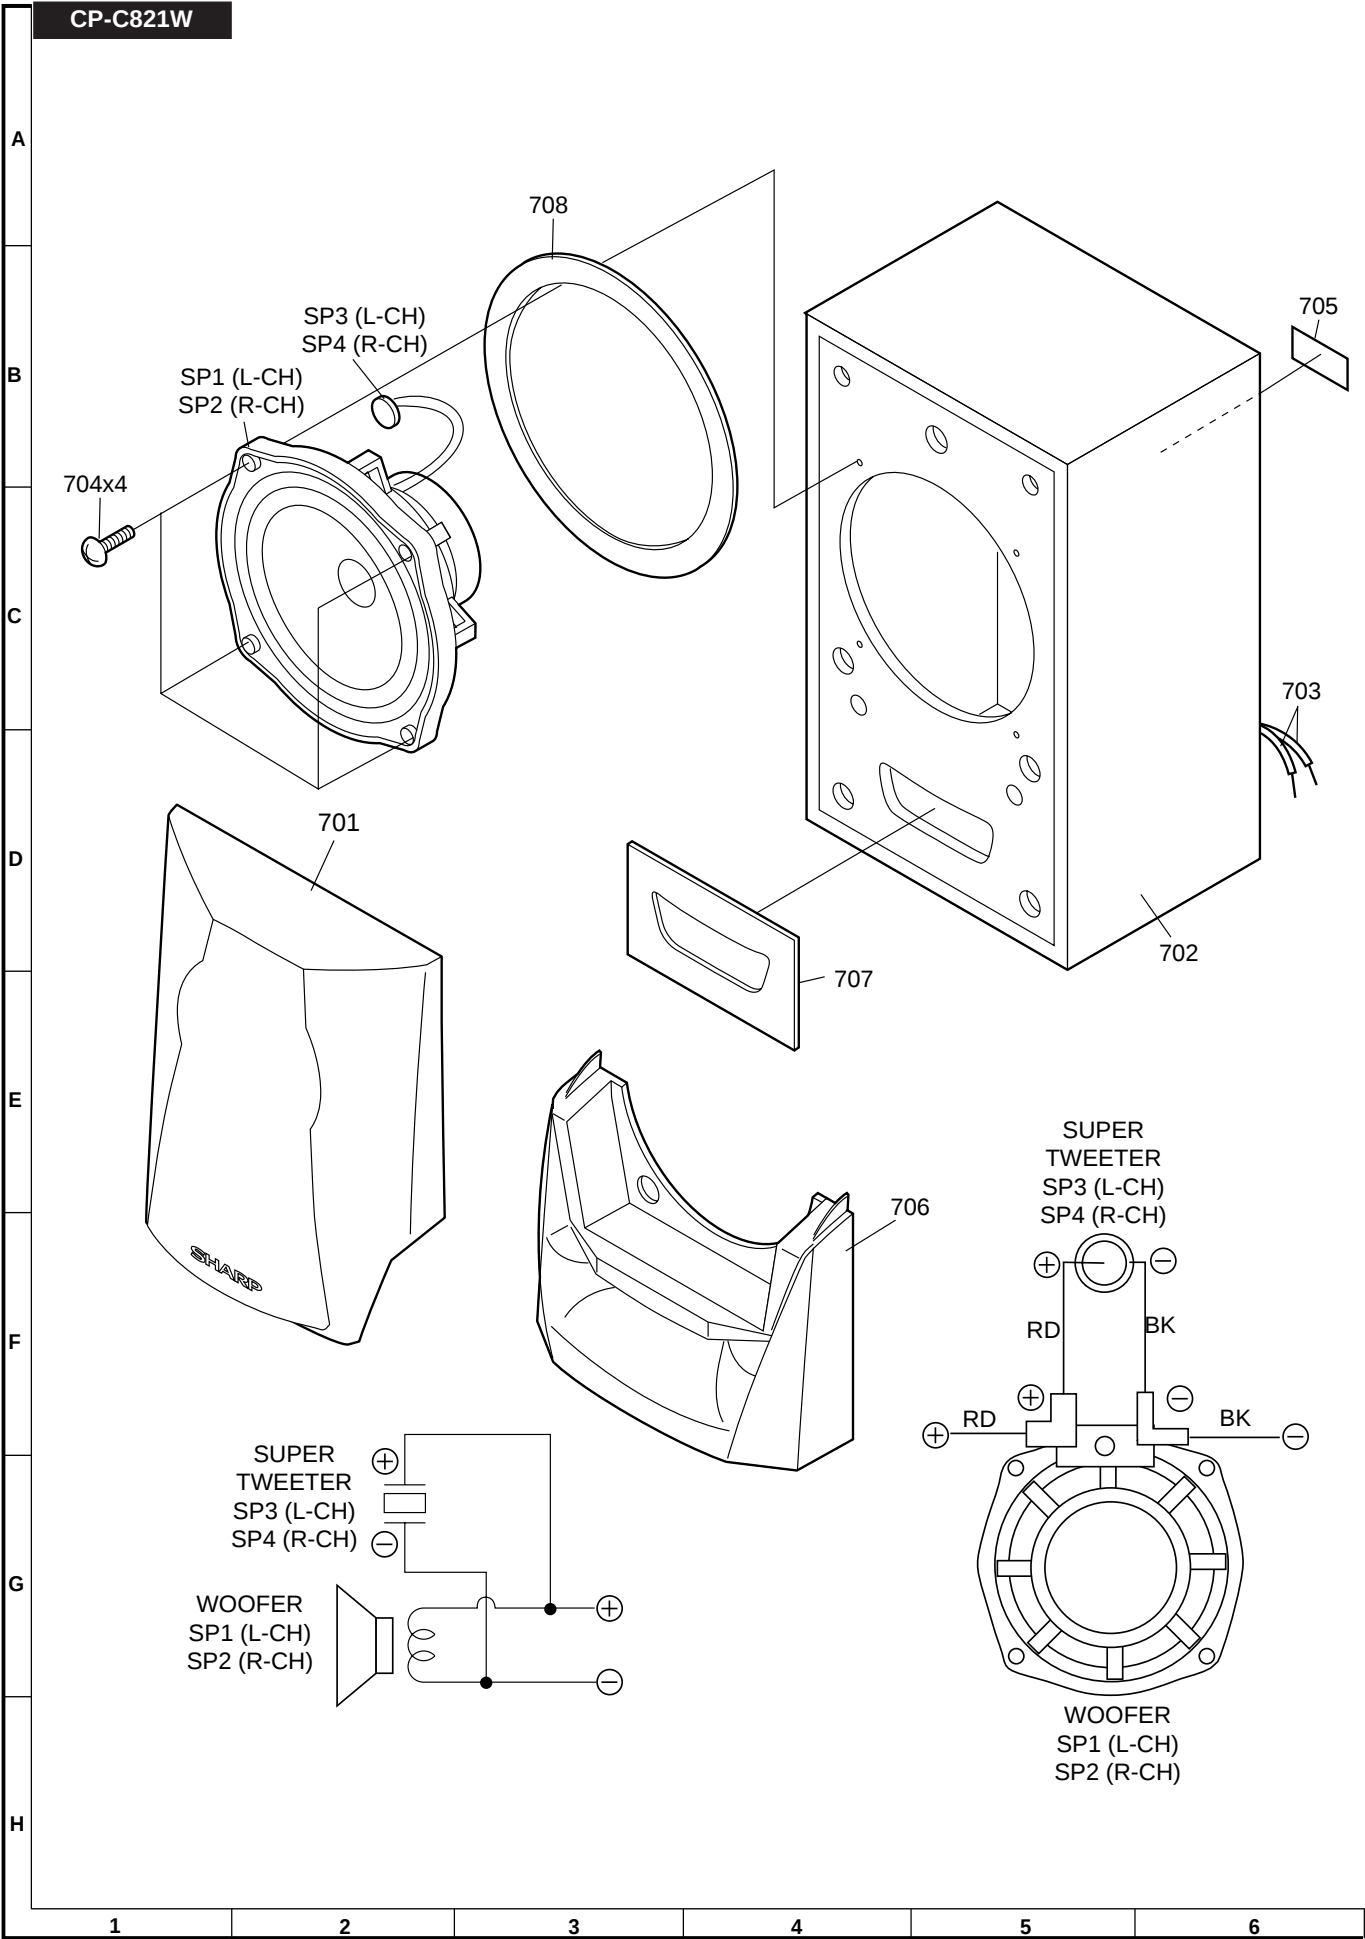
SPEAKER EXPLODED VIEW (1/3)
